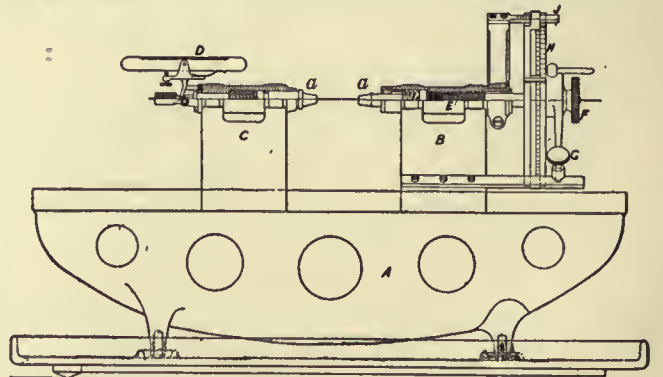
Measuring Machine. (The Newall Engineering Co.)
